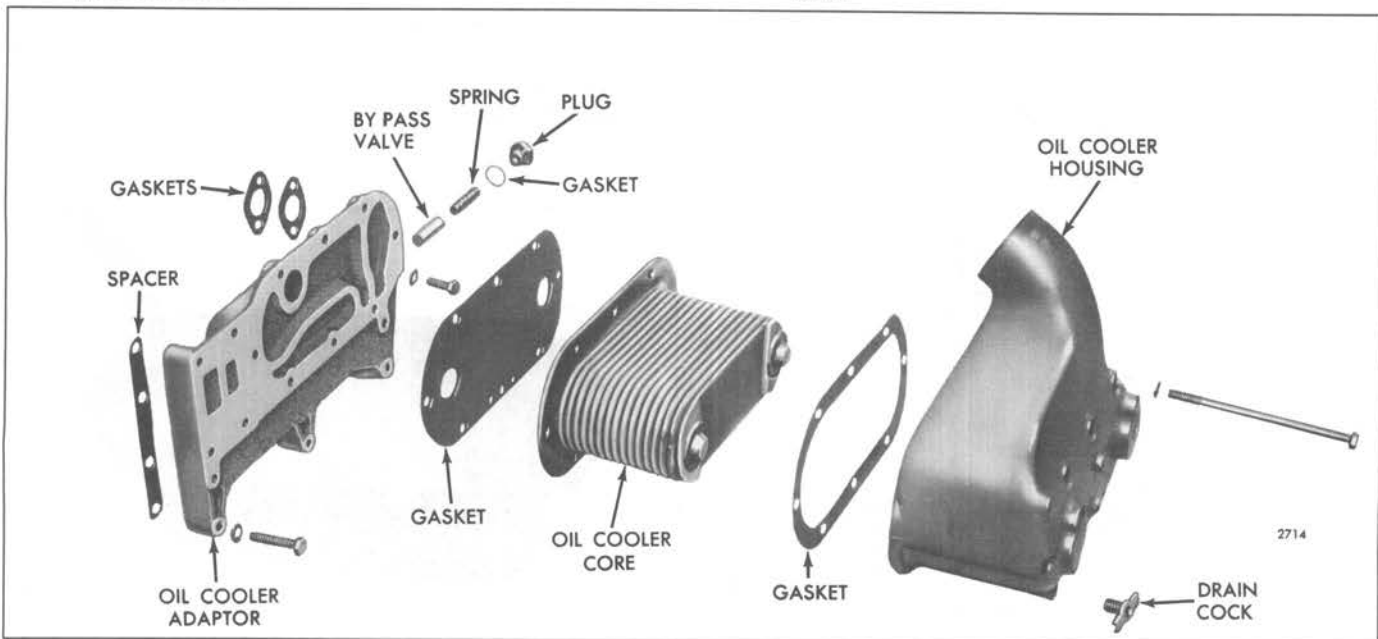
Oil Cooler Details and Relative Location of Parts
